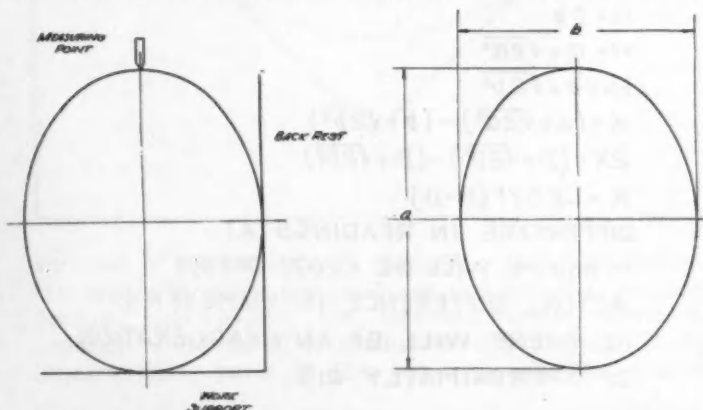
CHECKING OUT-OF-ROUNDNESS WITH MICROMETER CALIPERS
